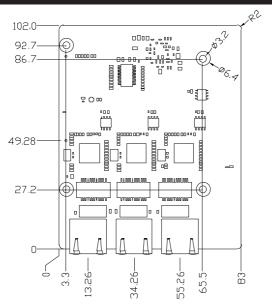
MIOe-220 Mechanical Drawing (Top Side)
